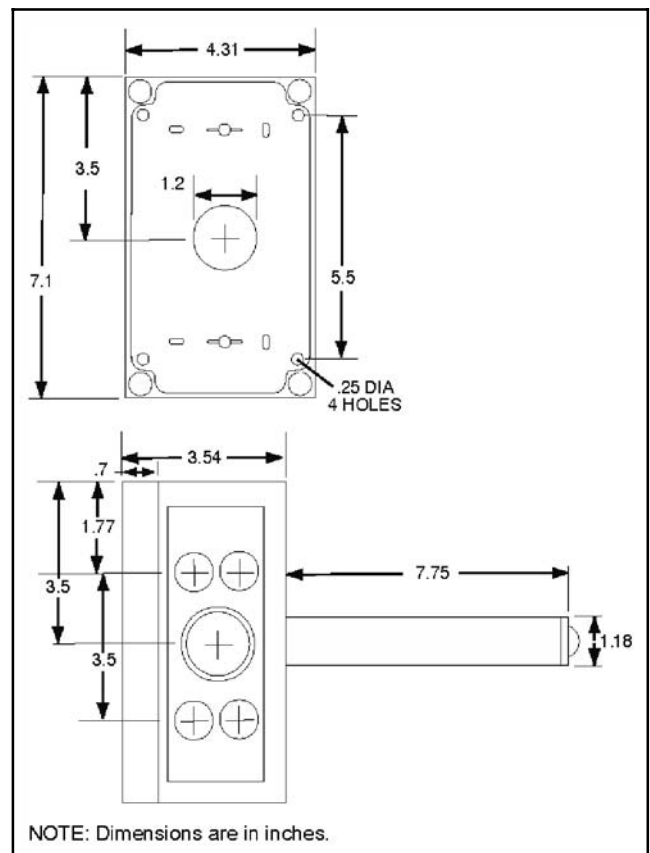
Aspirator Box Accessory (Part No. 33ZCASPCO2) and Dimensions
